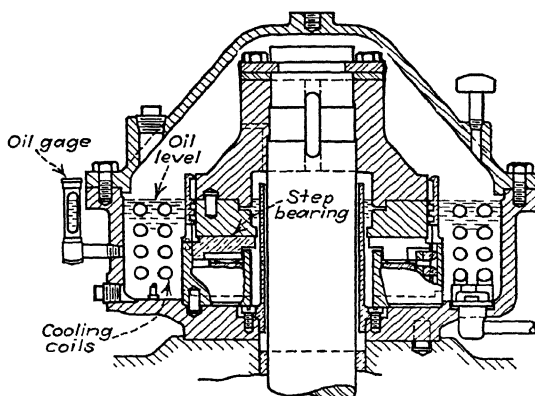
Bath-oiled Kingsbury-suspension bearing.
